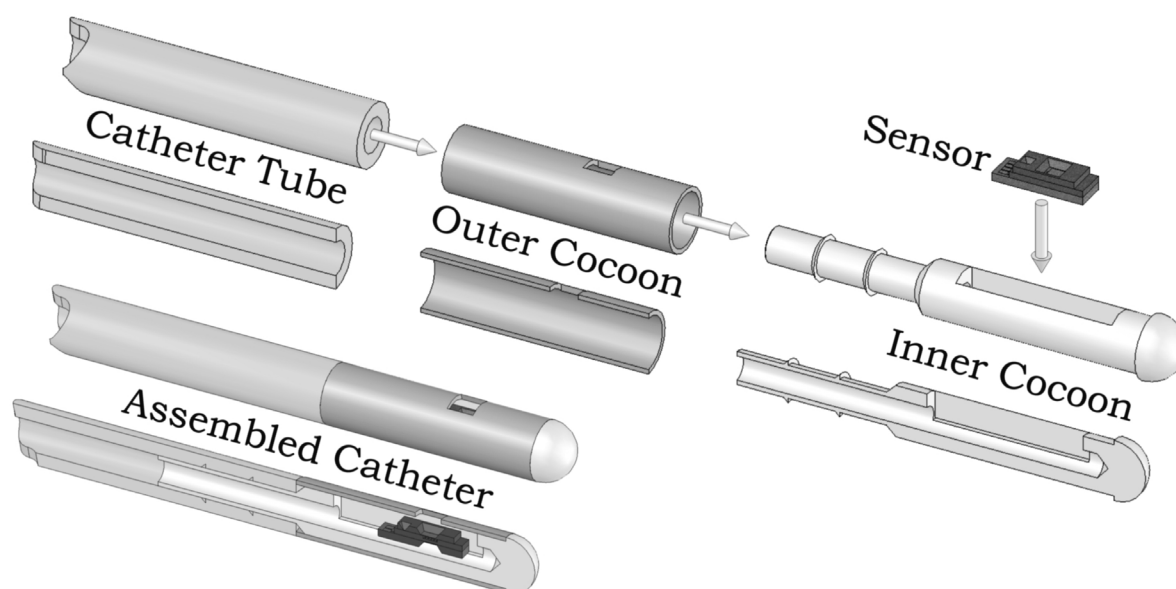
Schematic representation and cross-sectional view of the catheter parts and the assembled catheter (outer diameter is 2 mm).
